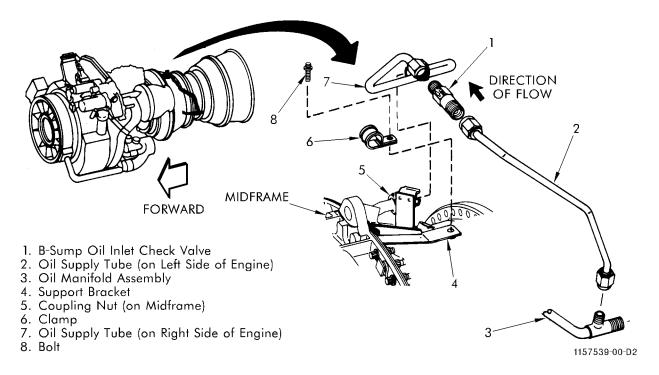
Oil Supply Tubes (Left-Hand and Right-Hand) and B-Sump Oil Inlet Check Valve;
